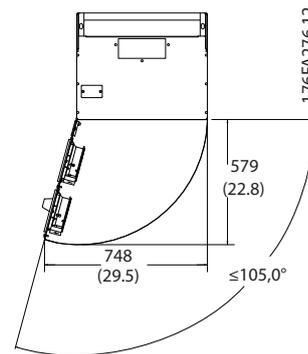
Front Clearance of IP21/IP54 Enclosure Type, Frame Size E1.
